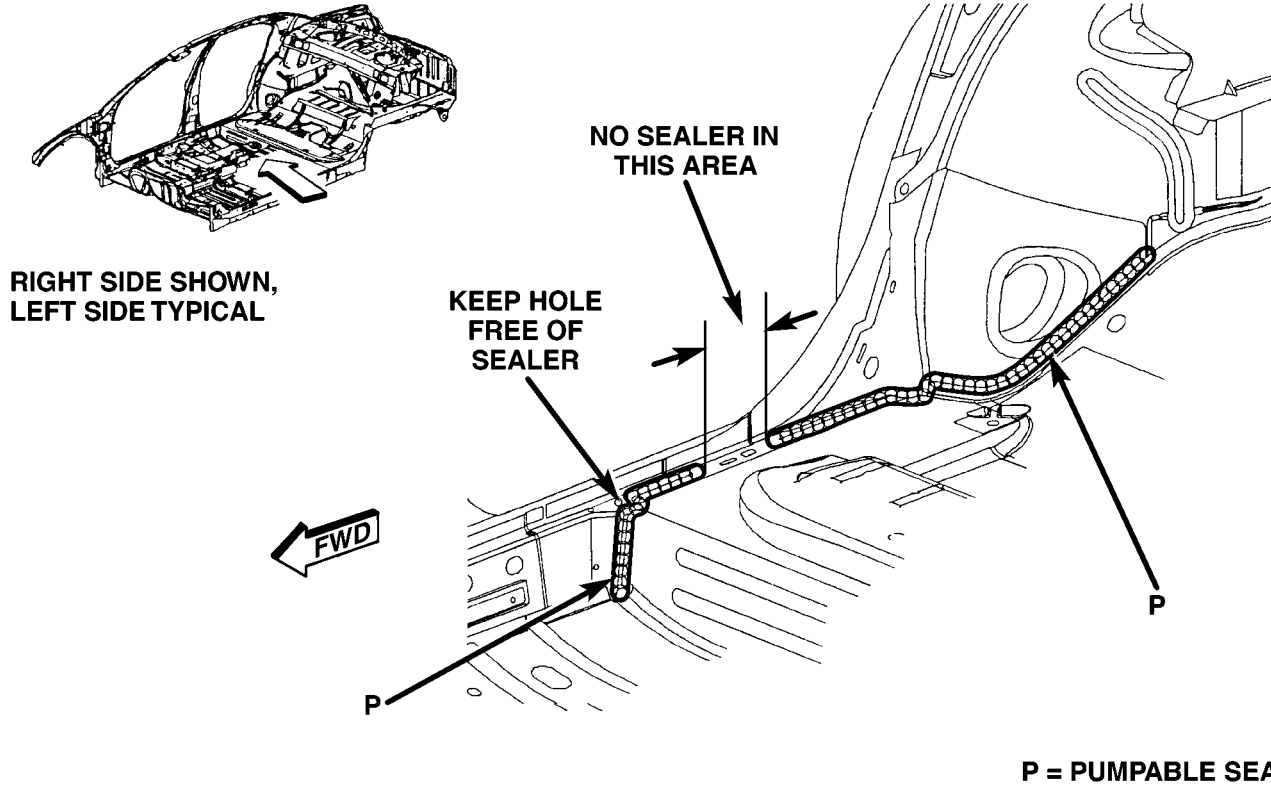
SILL INNER EXTENSION TO REAR FLOOR PAN
